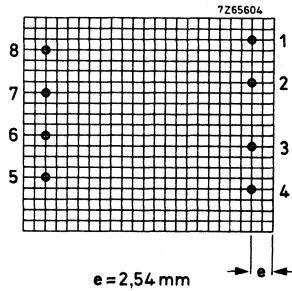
Hole pattern (viewed from solder side) for mounting on a printed-wiring board, hole diameter 1,3 + 0,1 mm.
